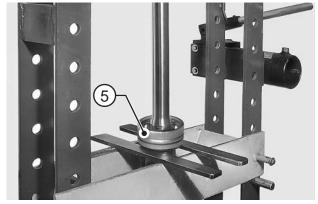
Place the u-joint under a press and remove the complete bushing (5).
